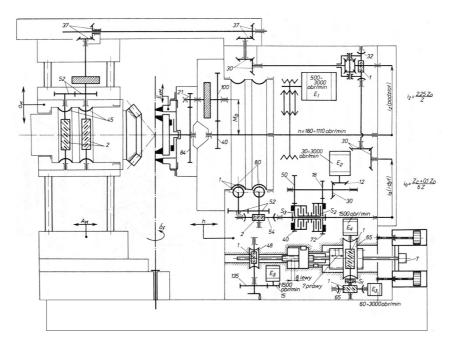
Kinematic scheme of AMK-635 Klingelnberg machine - tool
